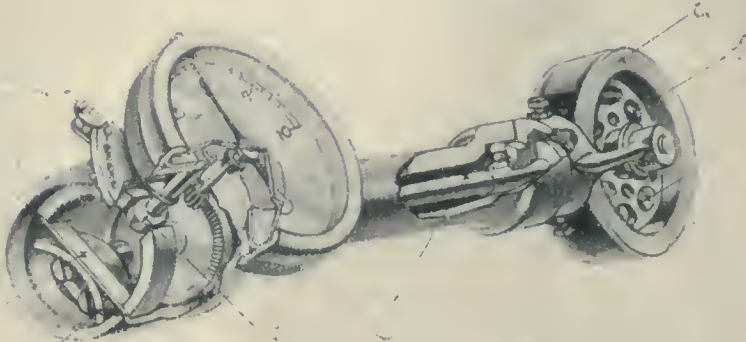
R.A.E. gyro turn indicator Mark V. *a*, gyro wheel; *b, b*, oblique holes for air-drive; *c*, shaft carrying gyro wheel communicating motion to pointer; *d*, cam on shaft *c*; *e*, controlling spring; *f*, cam altering tension of spring *e*, worked by lever *g*.
